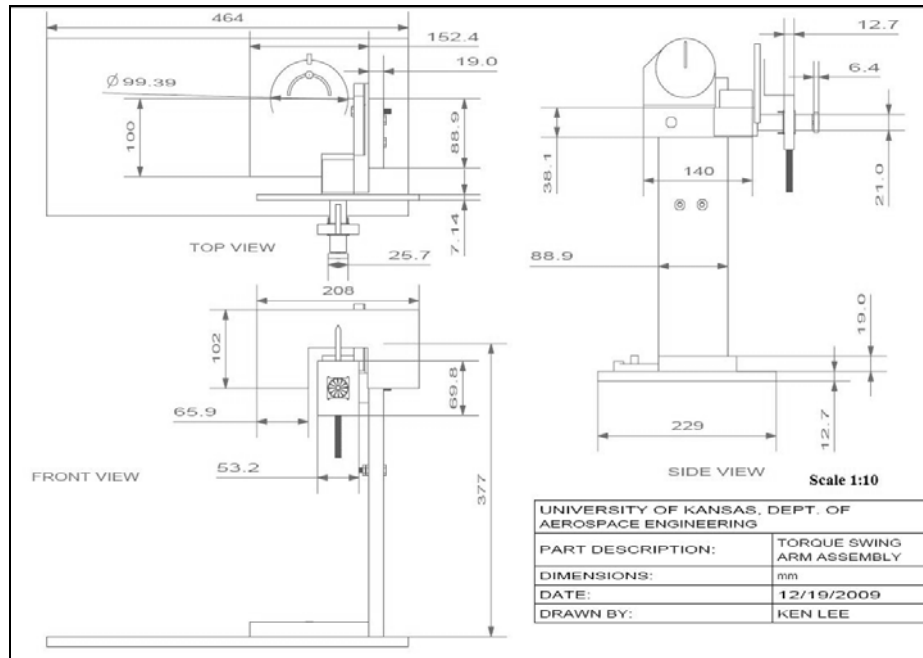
Top, Front and Side CAD Views of the Torque Measurement Assembly Drafted in UG NX 6.0.
